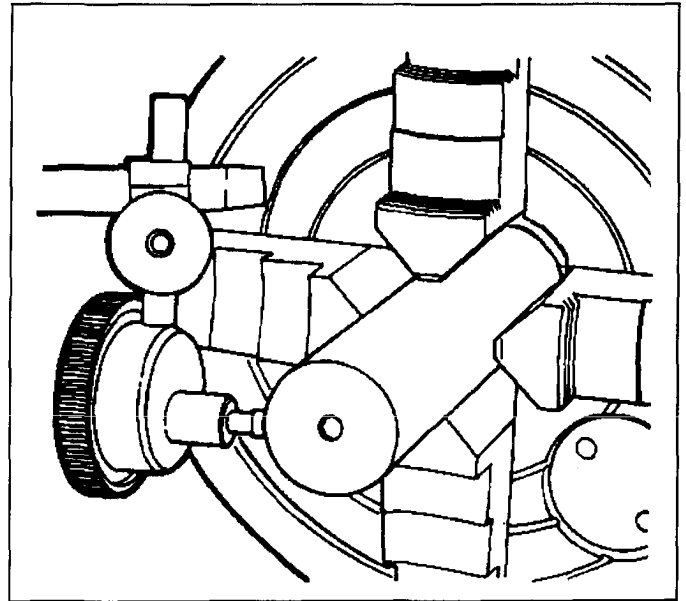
Mounting work in a 4-jaw independent chuck.
